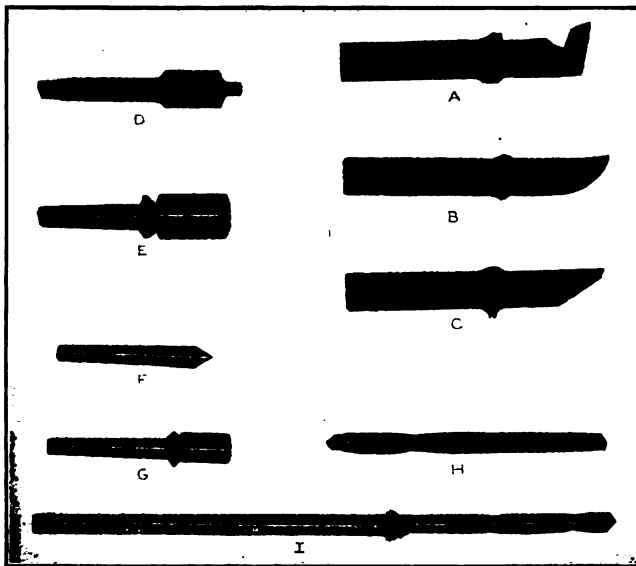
Butt-welded Work adapted to Tool-room and General Machine Shop Requirements
